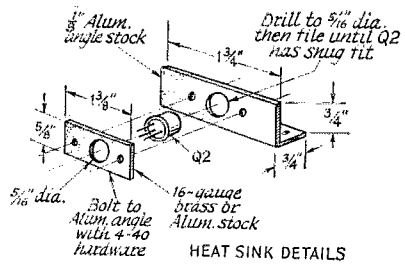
Layout and assembly details of the homemade heat sink for Q_2 . The completed assembly is insulated from the main chassis of the transmitter by using insulating washers or rubber grommets (see text).
